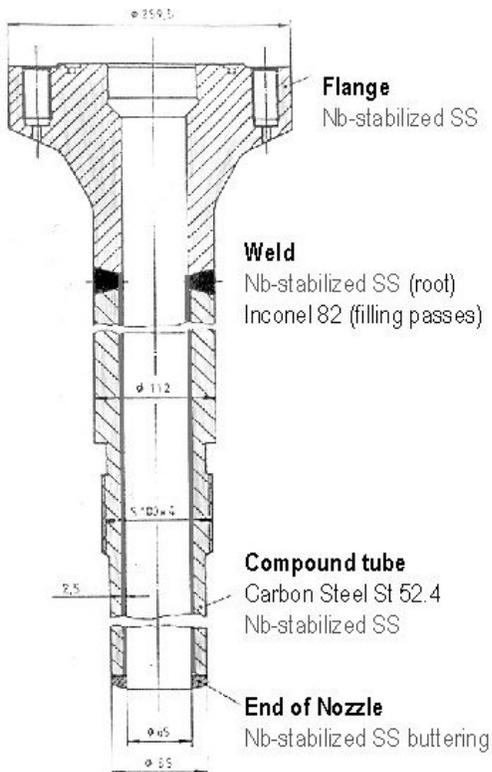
Head Penetration Nozzles: Compound tube St 52.4/1.4550; end of nozzle buttered with Nb-stabilized austenitic SS
